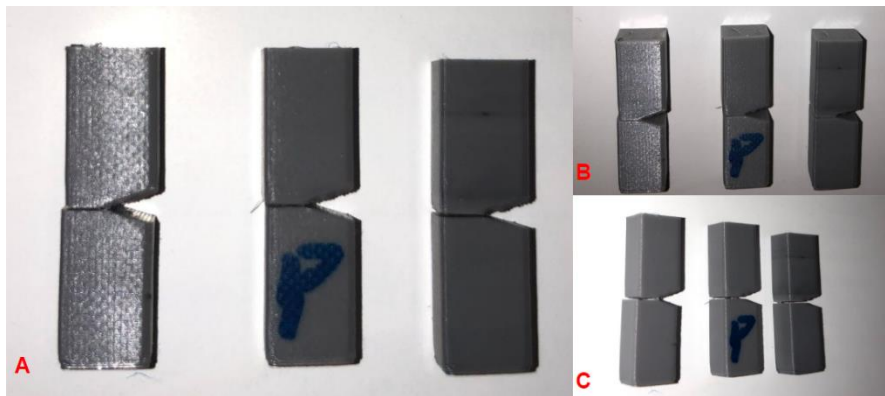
P_bb samples: A - front view; B – front and top view; C – Front and side view.
